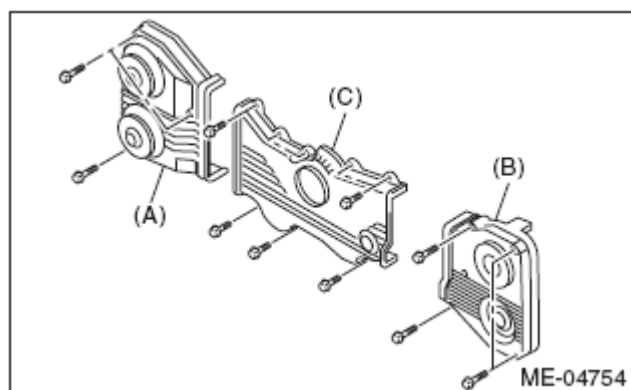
Identifying Timing Belt Covers And Mounting Bolts
